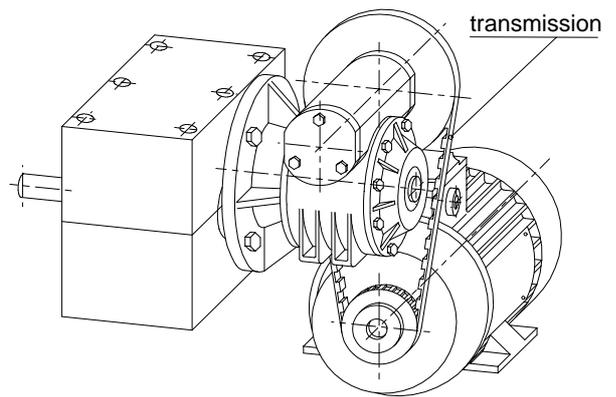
Rigid motor drive with transmission of fast worm gear reducer shaft.
